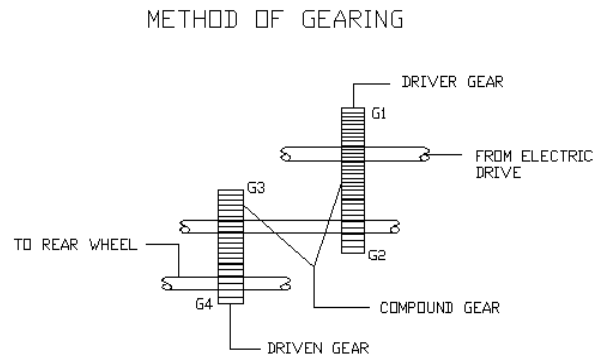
Showing Sprocket Gear Drive of Motor
